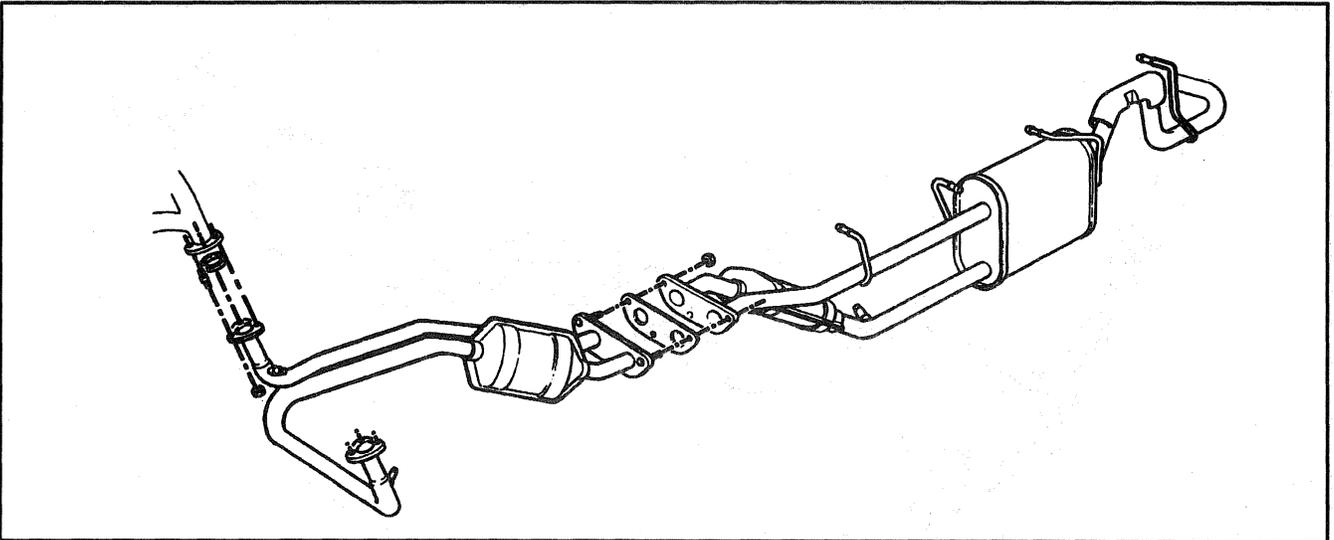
Exhaust System - C 318 Cab Chassis w/7.4L Engine
